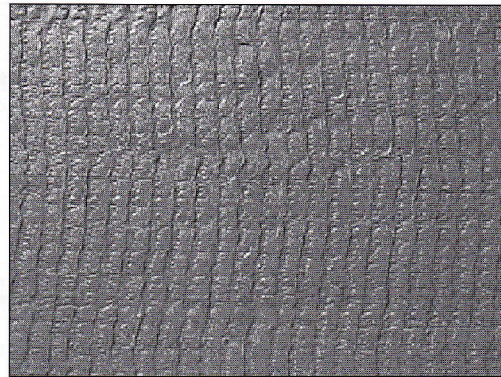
Surface of a 160 mm square billet at 1.2 m/min (AISI 304).
